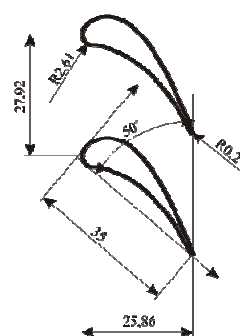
Geometry of rotor blades (1st stage – C9018A)
